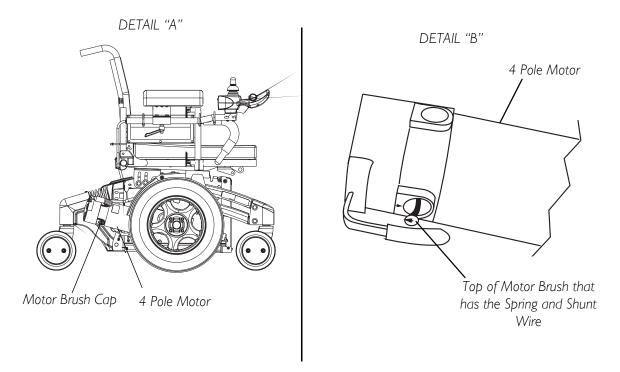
MOTOR BRUSH INSPECTION AND/OR REPLACEMENT4 POLE MOTOR
